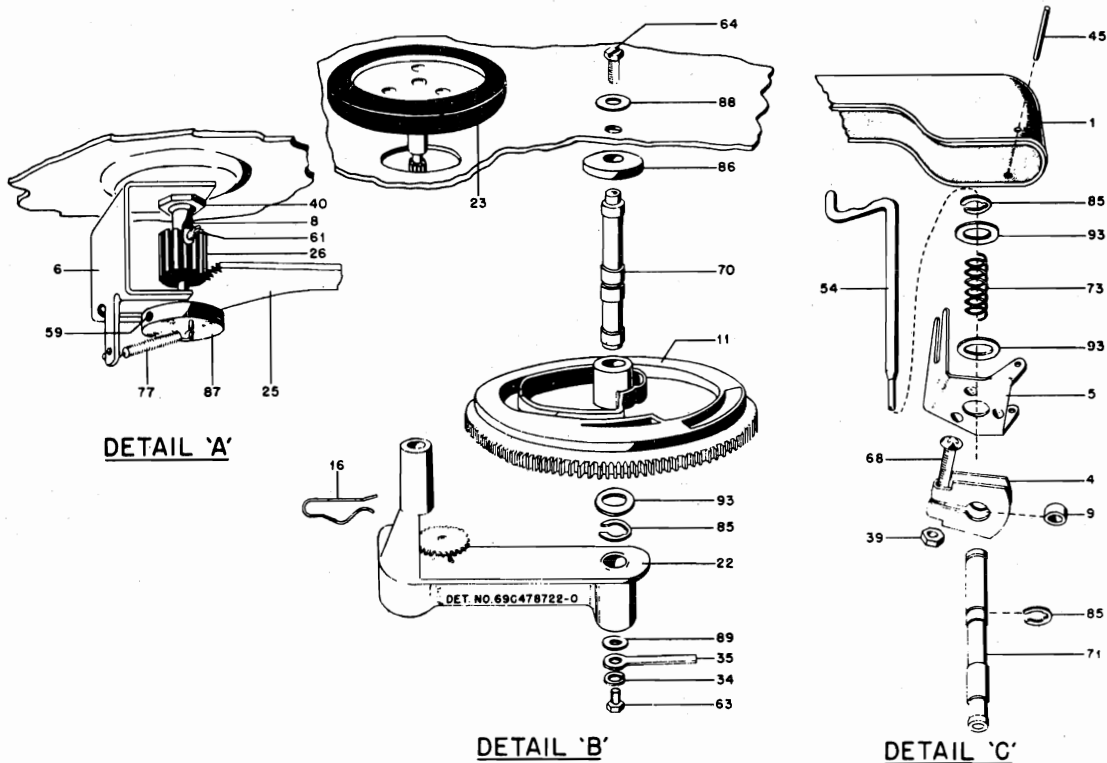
PARTS LOCATION - DETAILED ASSEMBLIES
